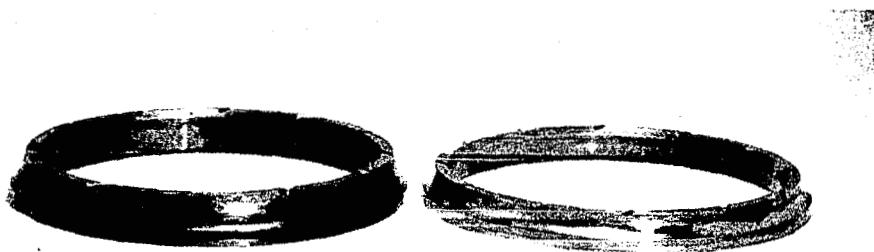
Appearance of Damaged Thrust-Loaded Inner Ring (Left) and Unloaded Inner Ring (Right) – Drilled-Ball Bearing S/N 2600A-2
